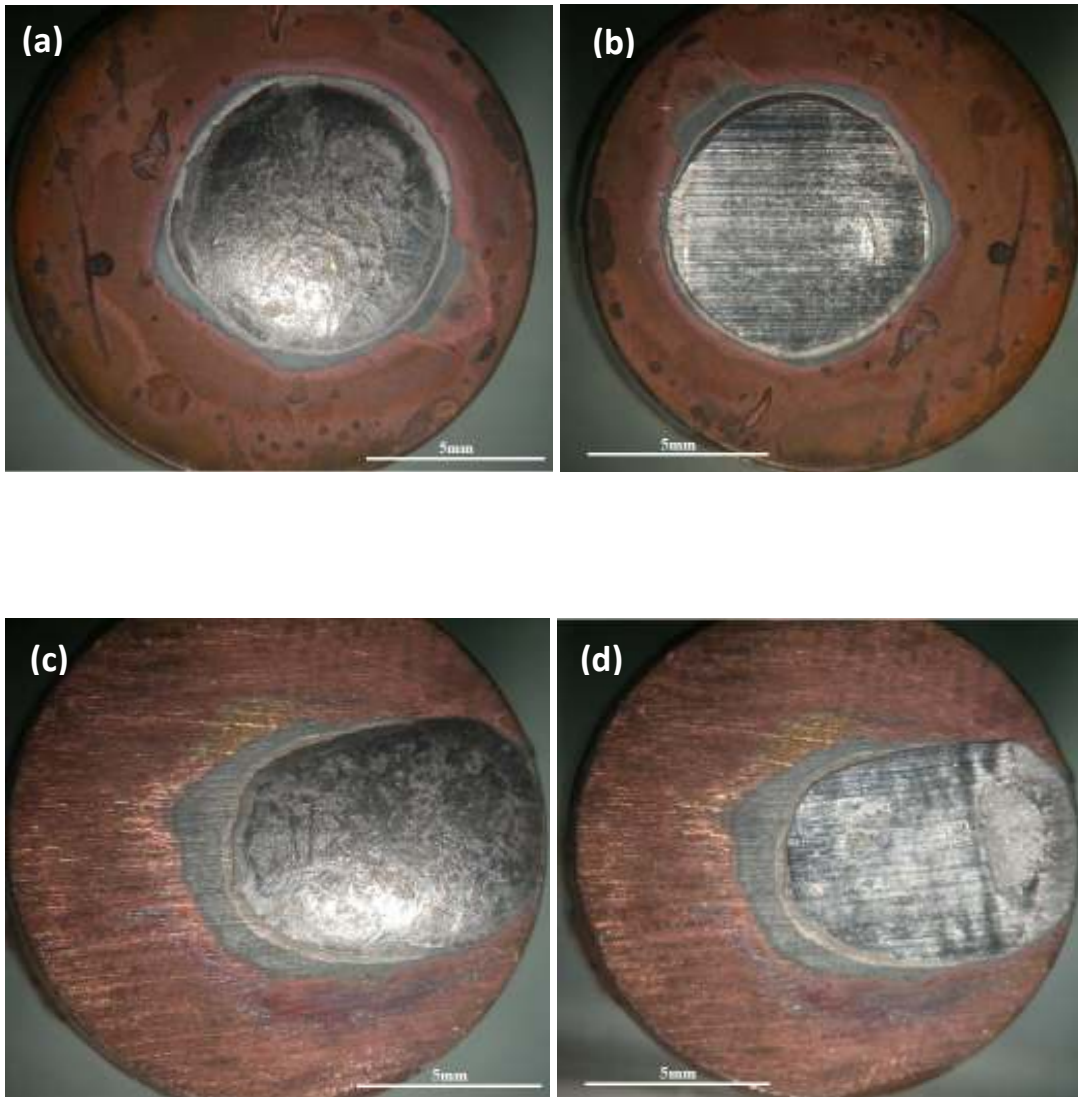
Macroscopic images (top view) of stabilized Sn-2.5Ag-0.5Cu solder on (a) smooth copper surface (c) rough copper surface. Macroscopic images (top view) of sheared Sn-2.5Ag-0.5Cu solder on (b) smooth copper surface (d) rough copper surface.
